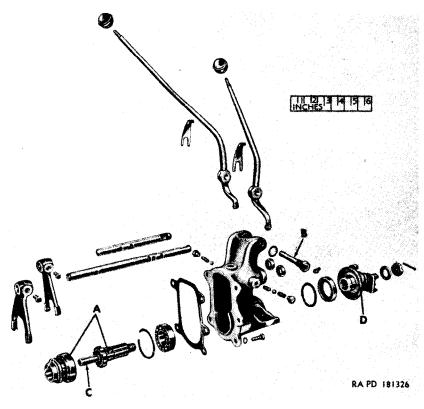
Transfer repair and rebuild measuring points-bearing retainer.
